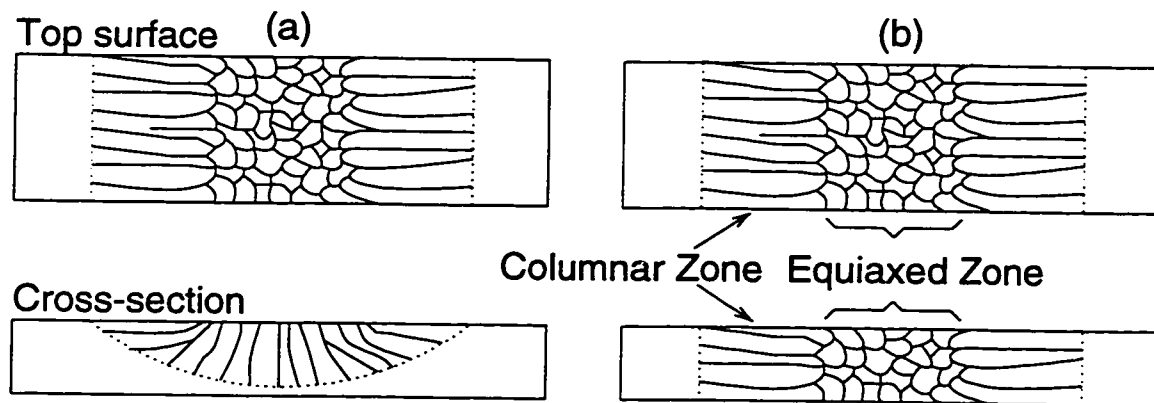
Schematic of weld sections exhibiting heat flow conditions of (a) three dimensions and (b) two dimensions.
